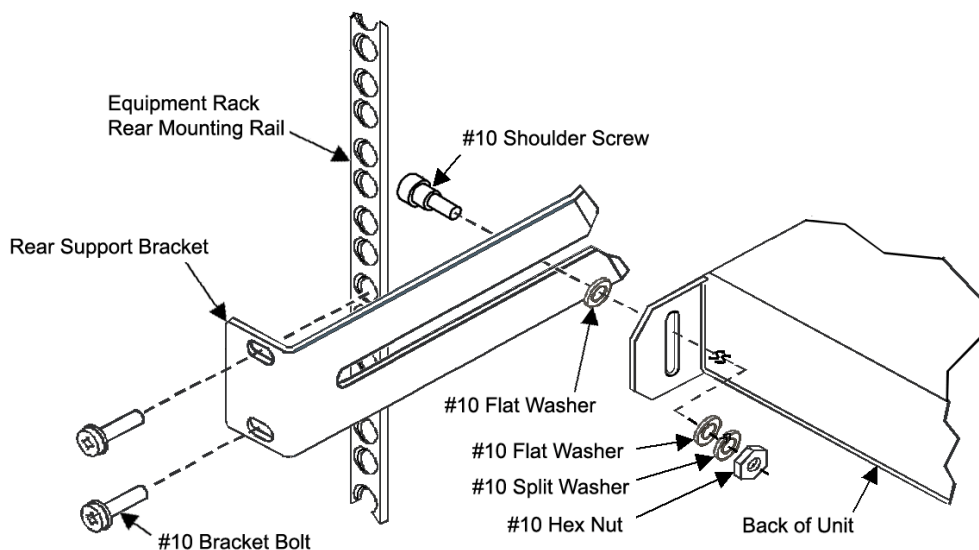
Optional Rear-Mounting Support Brackets Installation
